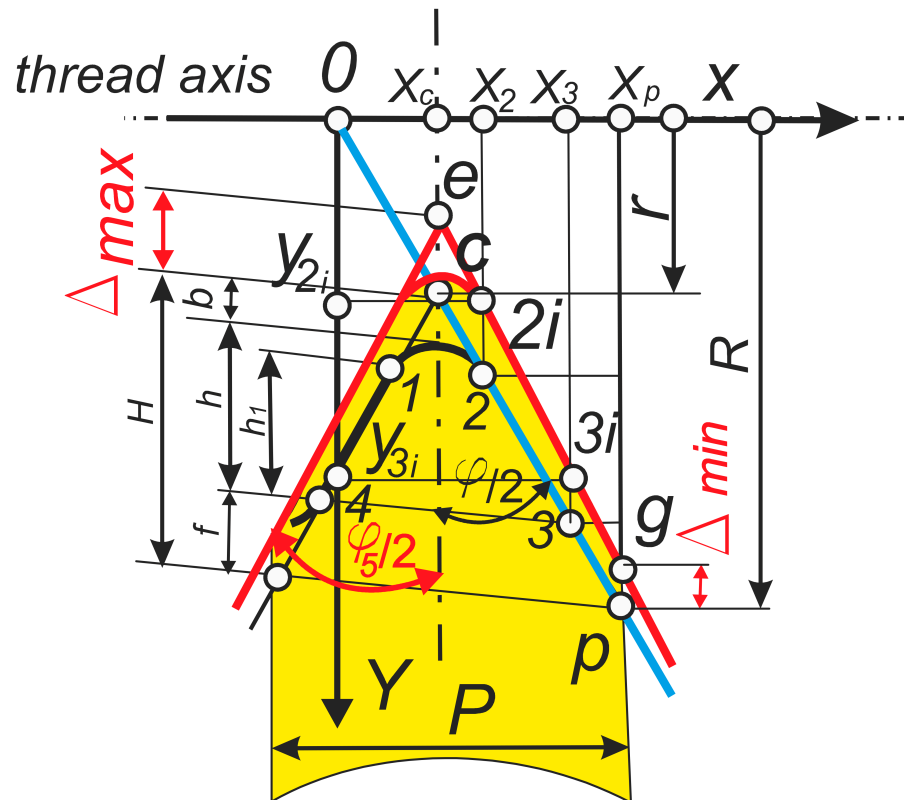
Cutting edge model of a tool for turning API 7 Standard tool-joint threads.
